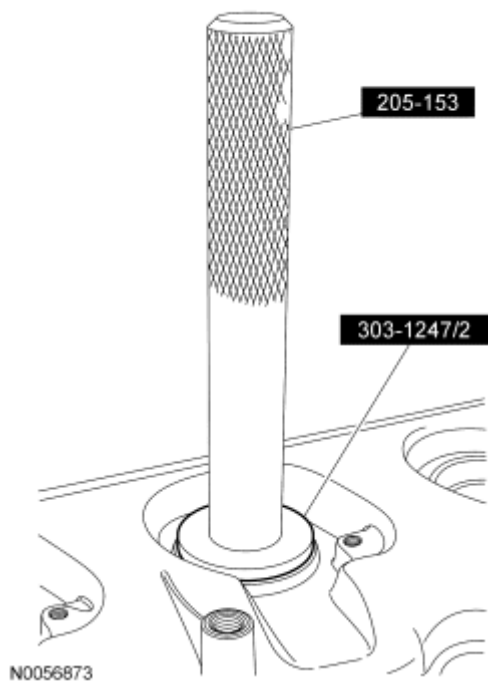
Installing VCT Solenoid And/Or Spark Plug Tube Seals Using Special Tools (205-153) & (303-1247/2)
